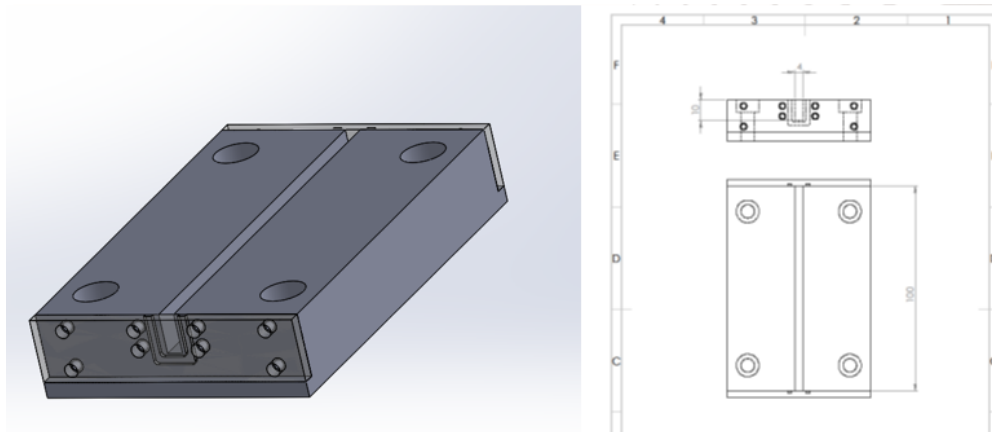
Measure chamber support was designed by a CAD software (SolidWorks). Dimensions in millimetres.
